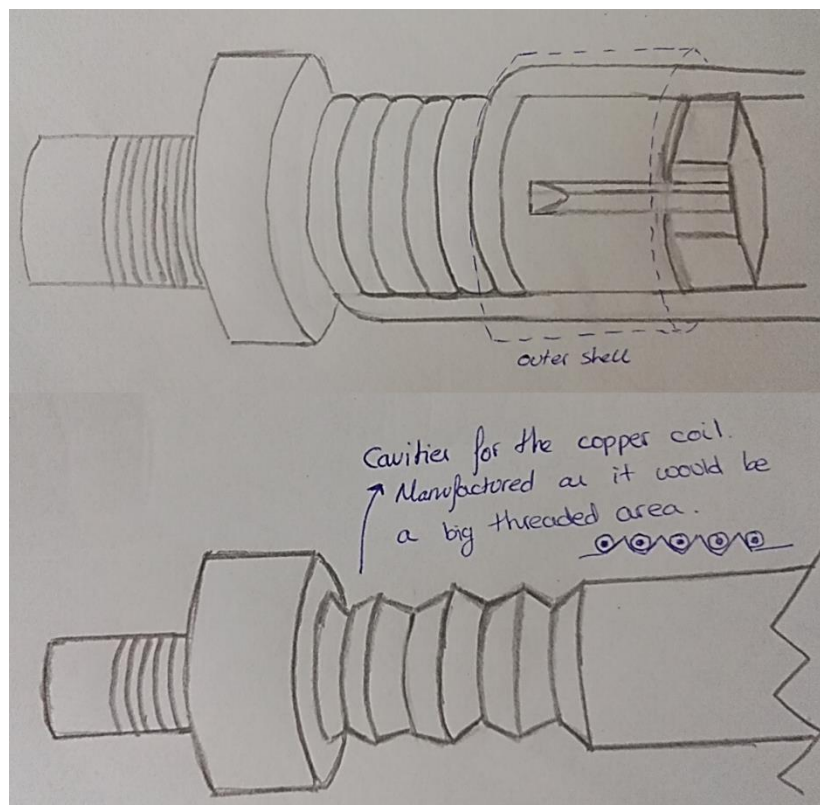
Model N°4; On the upper part the adapter with the copper coil is shown; on the lower part the machined surface of the adapter without the copper coil
